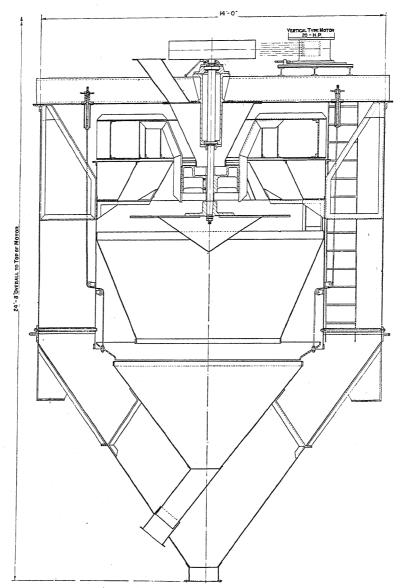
SECTION OF MODERN AIR SEPARATOR
